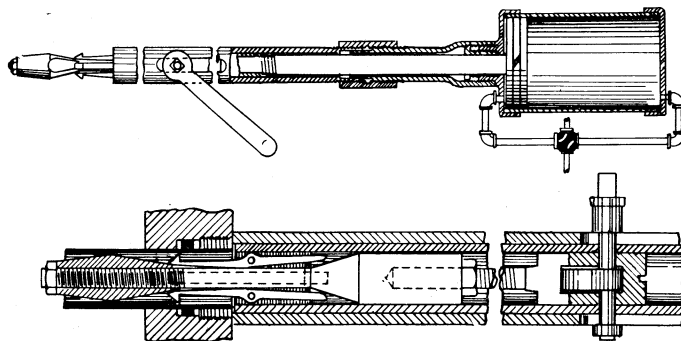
TUBE PULLER WHICH REMOVES TUBE AND PACKING AT ONE OPERATION
